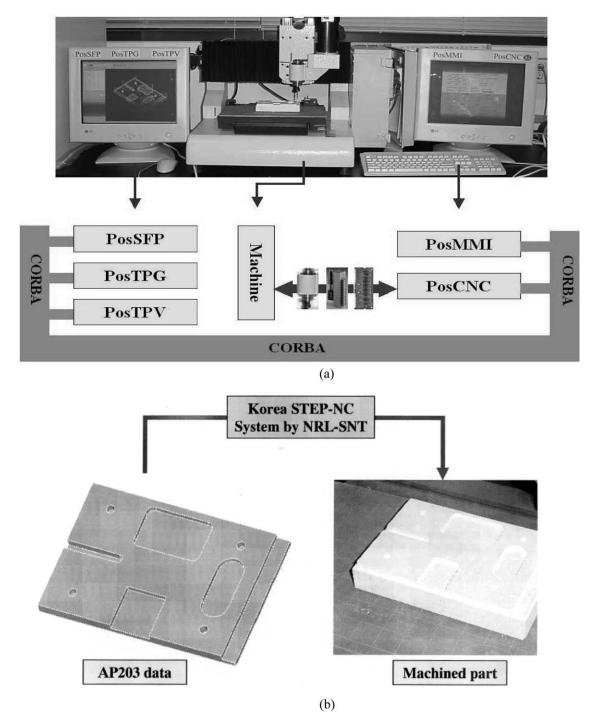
The prototype Korea STEP-NC and the machined part. (a) Korea STEP-NC prototype, (b) the designed part and the machined part.
